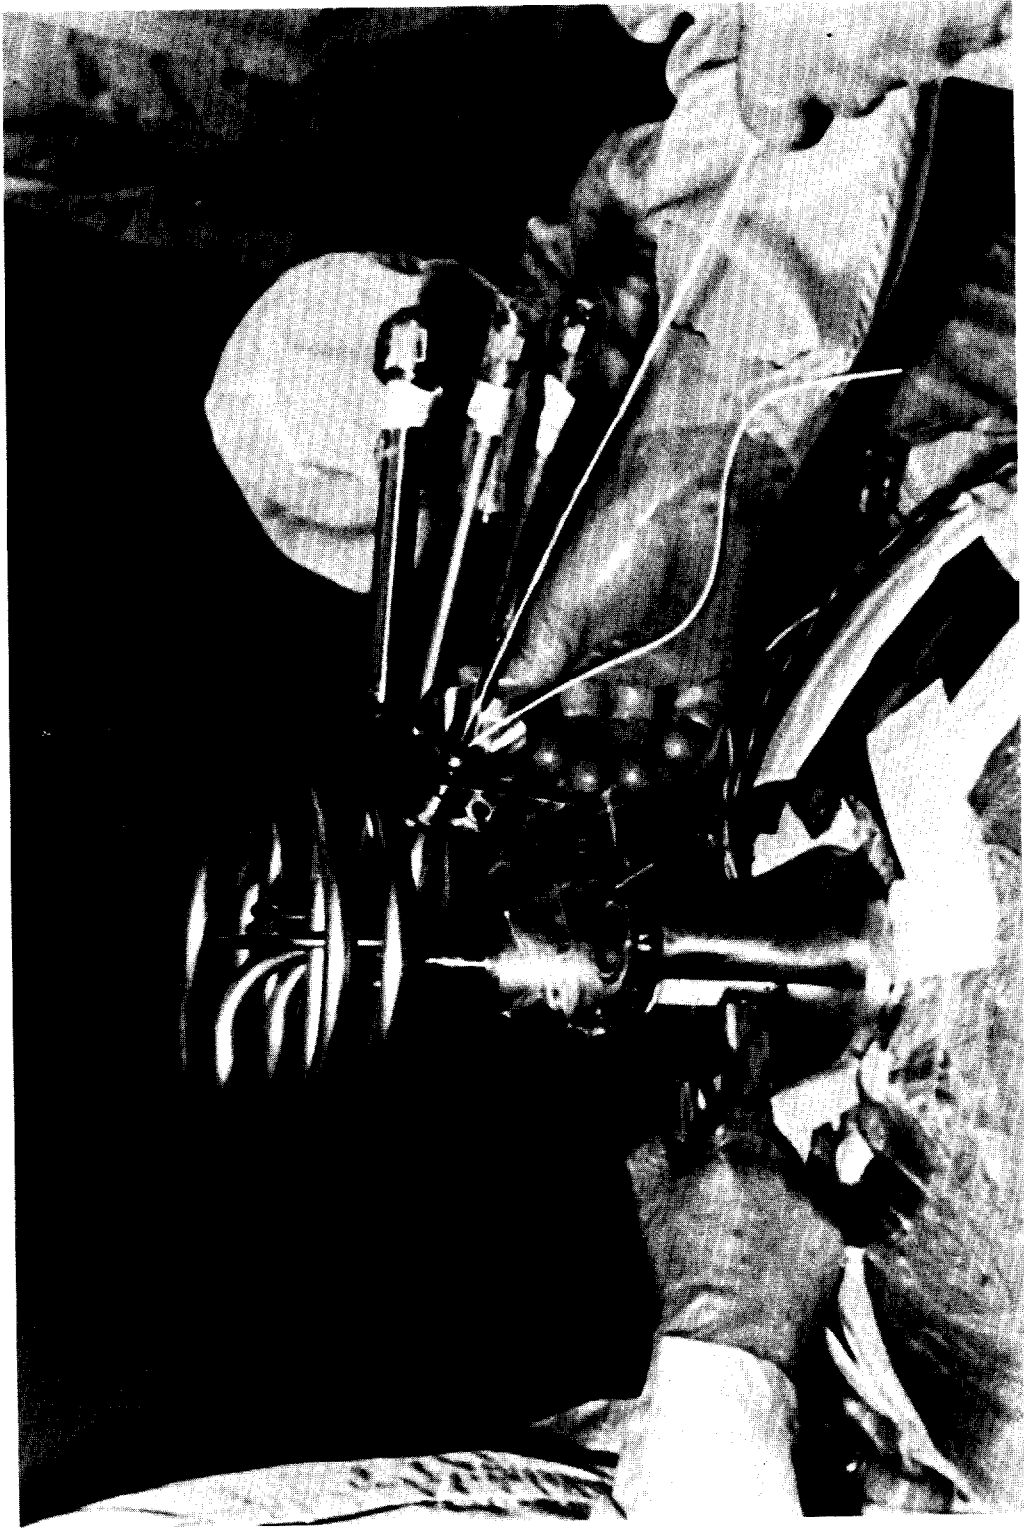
Pull wire used to route heater and fan motor leads into upper coil assembly.
